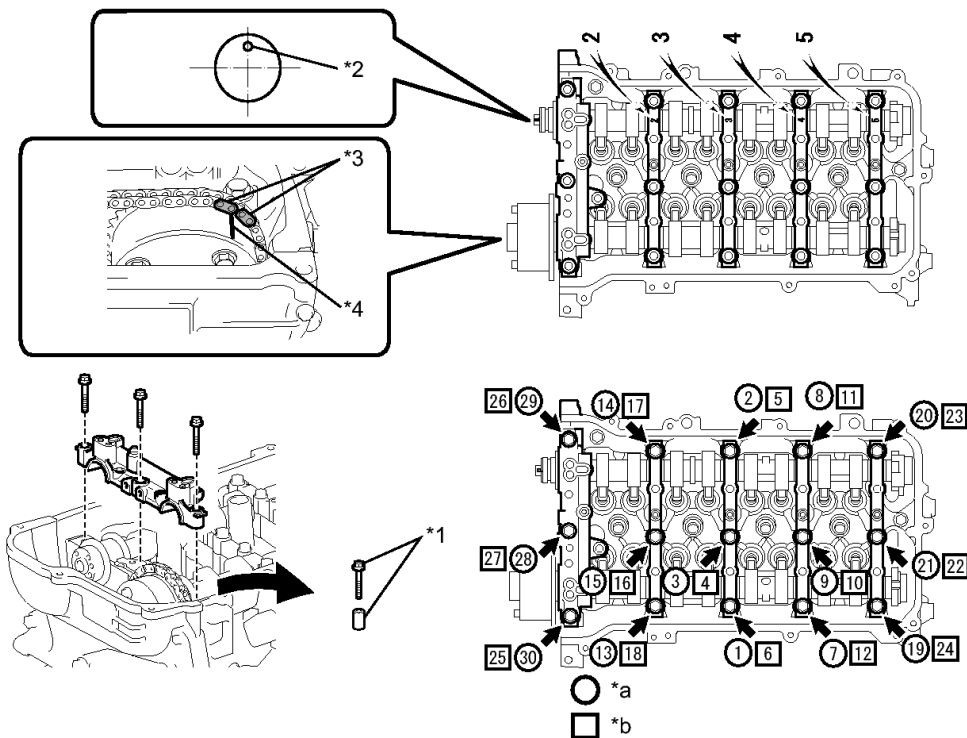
Removing/Installing Bearing Caps And Bolts In Sequence
